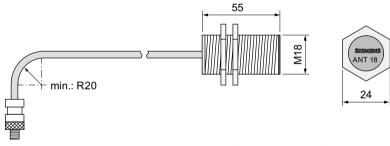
Dimension drawing ANT 18 (all values in mm)
